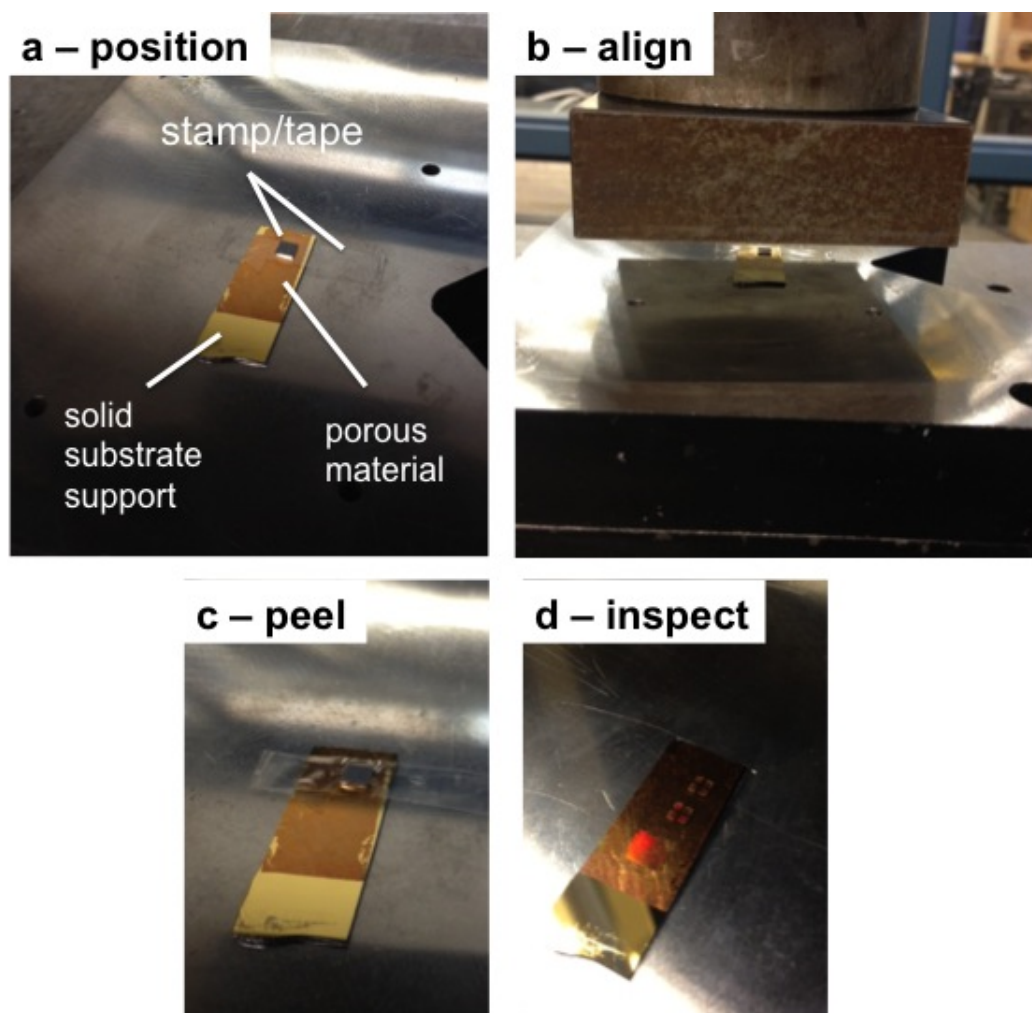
Images illustrating the DIPS process being performed on npAu with the Tinius Olsen testing machine, highlighting four key steps to consider before and after imprinting, including (a) positioning, (b) alignment, (c) peeling or removal of the stamp, and (d) inspection of the patterned porous substrate.
